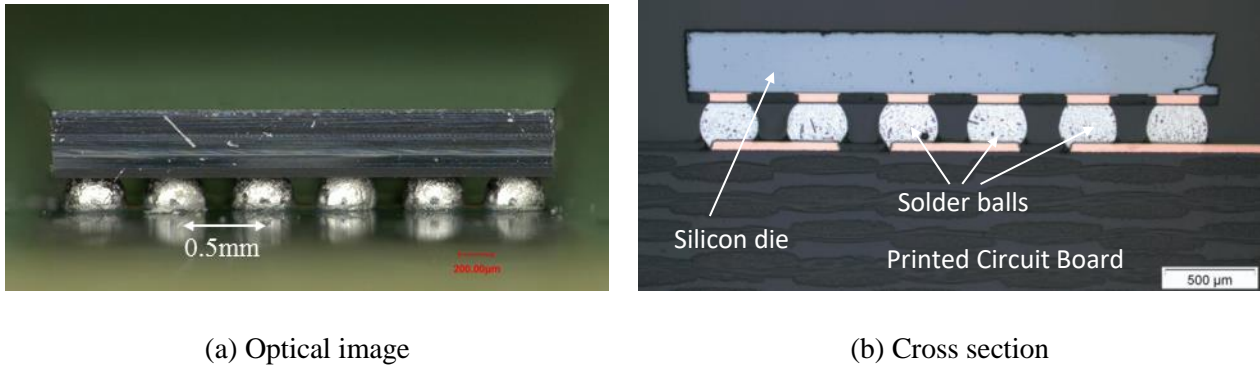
Wafer Level Package of the sample assembled on the Printed Circuit Board: (a) optical image of the package and (b) cross section showing the matrix of solder balls
